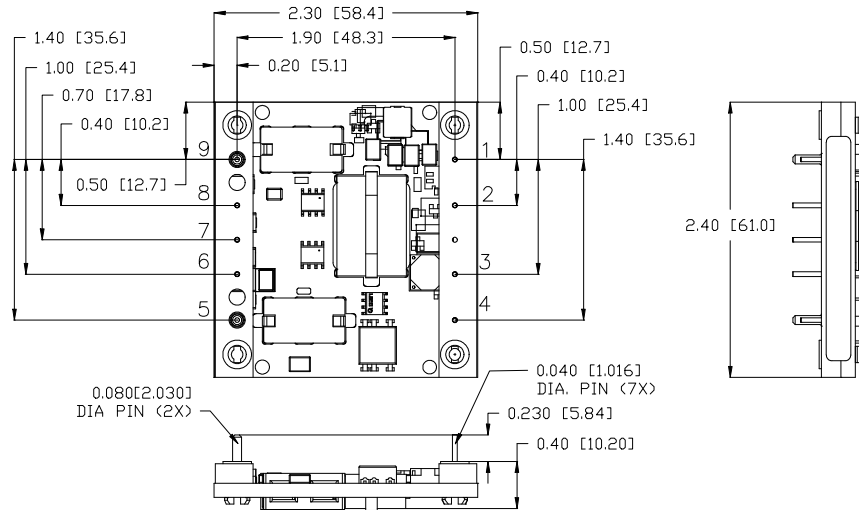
ALH60 - open-frame outline drawing (bottom view)
